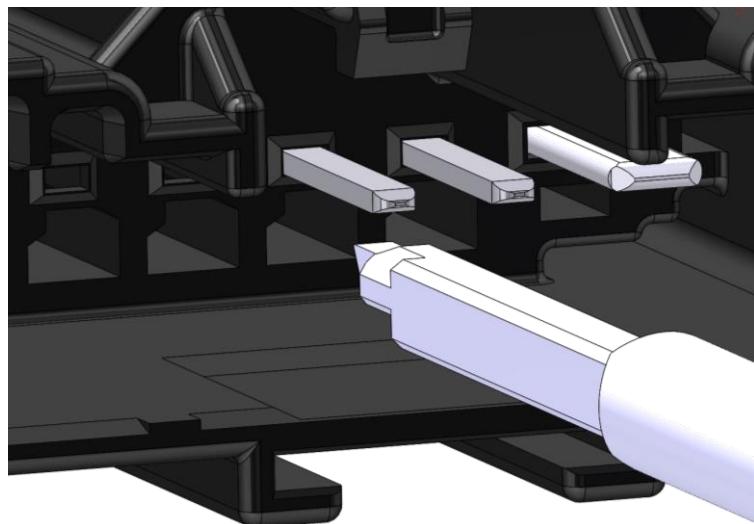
1.2 removal tool alignment with the 1.2 cavity – male connector / Alignement de l'outil avec la cavité – porte-langueutes
